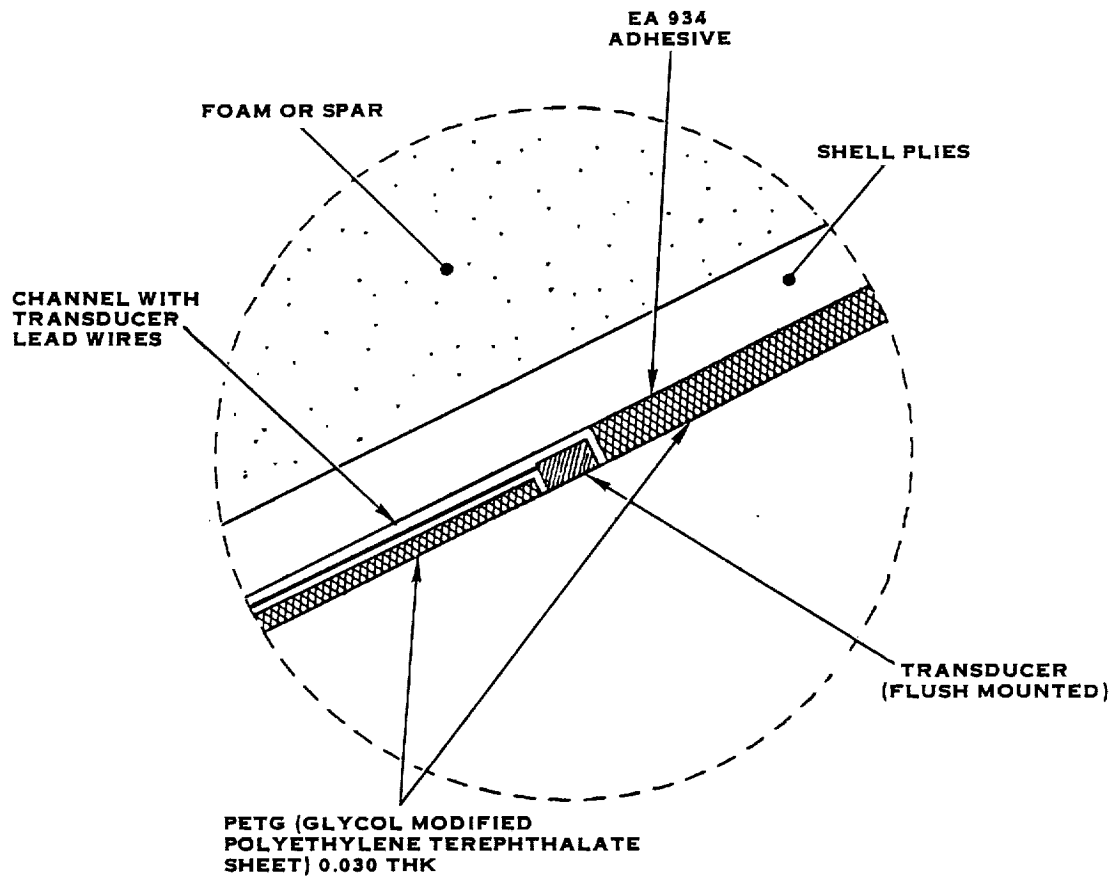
LAP SR-7L UNSTEADY PRESSURE BLADE TRANSDUCER MOUNTING
